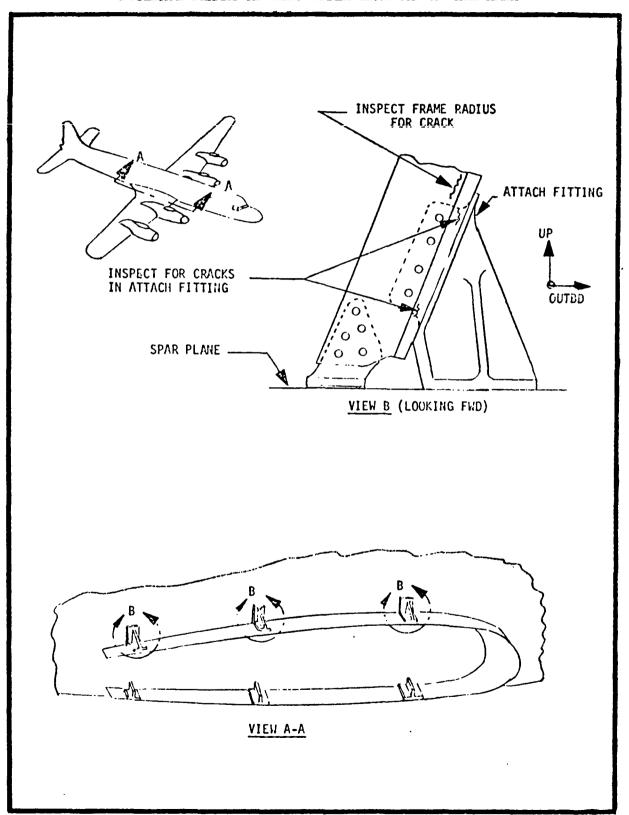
HORIZONTAL STABILIZER-TO-TAIL STUB FRONT SPAR ATTACH FITTING
